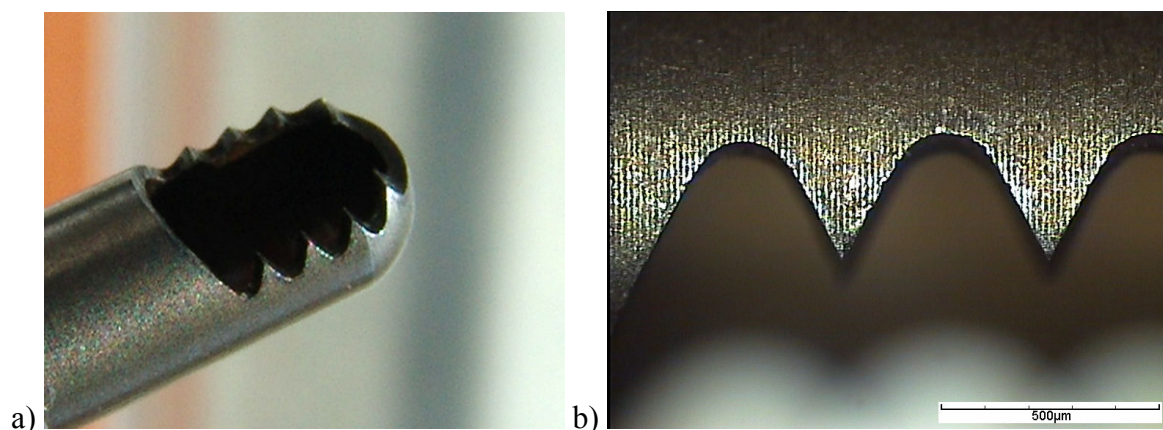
Ø5.2mm 316L stainless steel tube directly after LMJ cutting, a) view of the finished part and b) microscopic image of front surface
